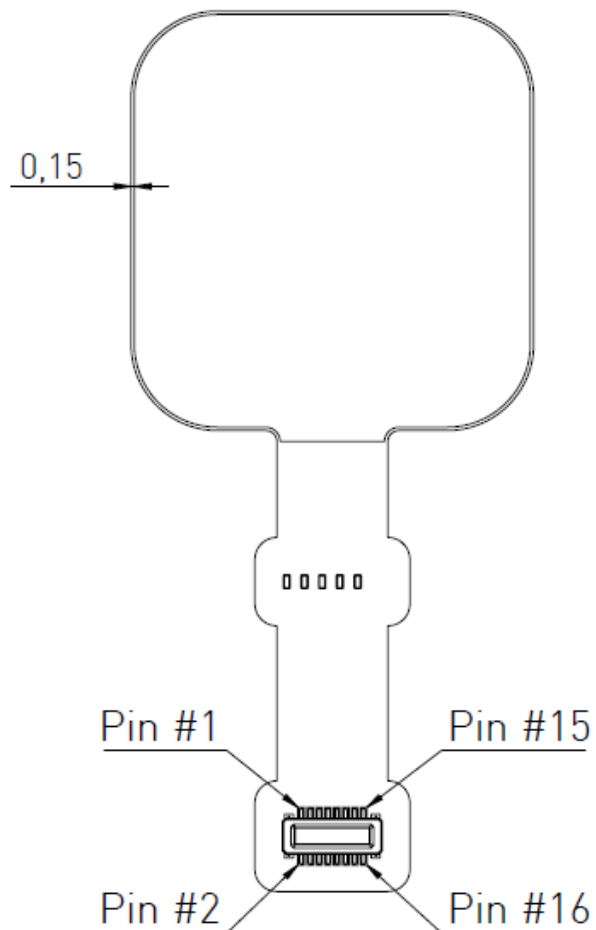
Part Drawing FPC1020AM CM04 – bottom view
